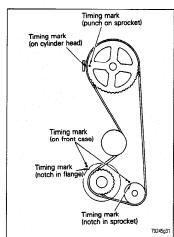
Timing belt pulley alignment marks-2.4L engine
